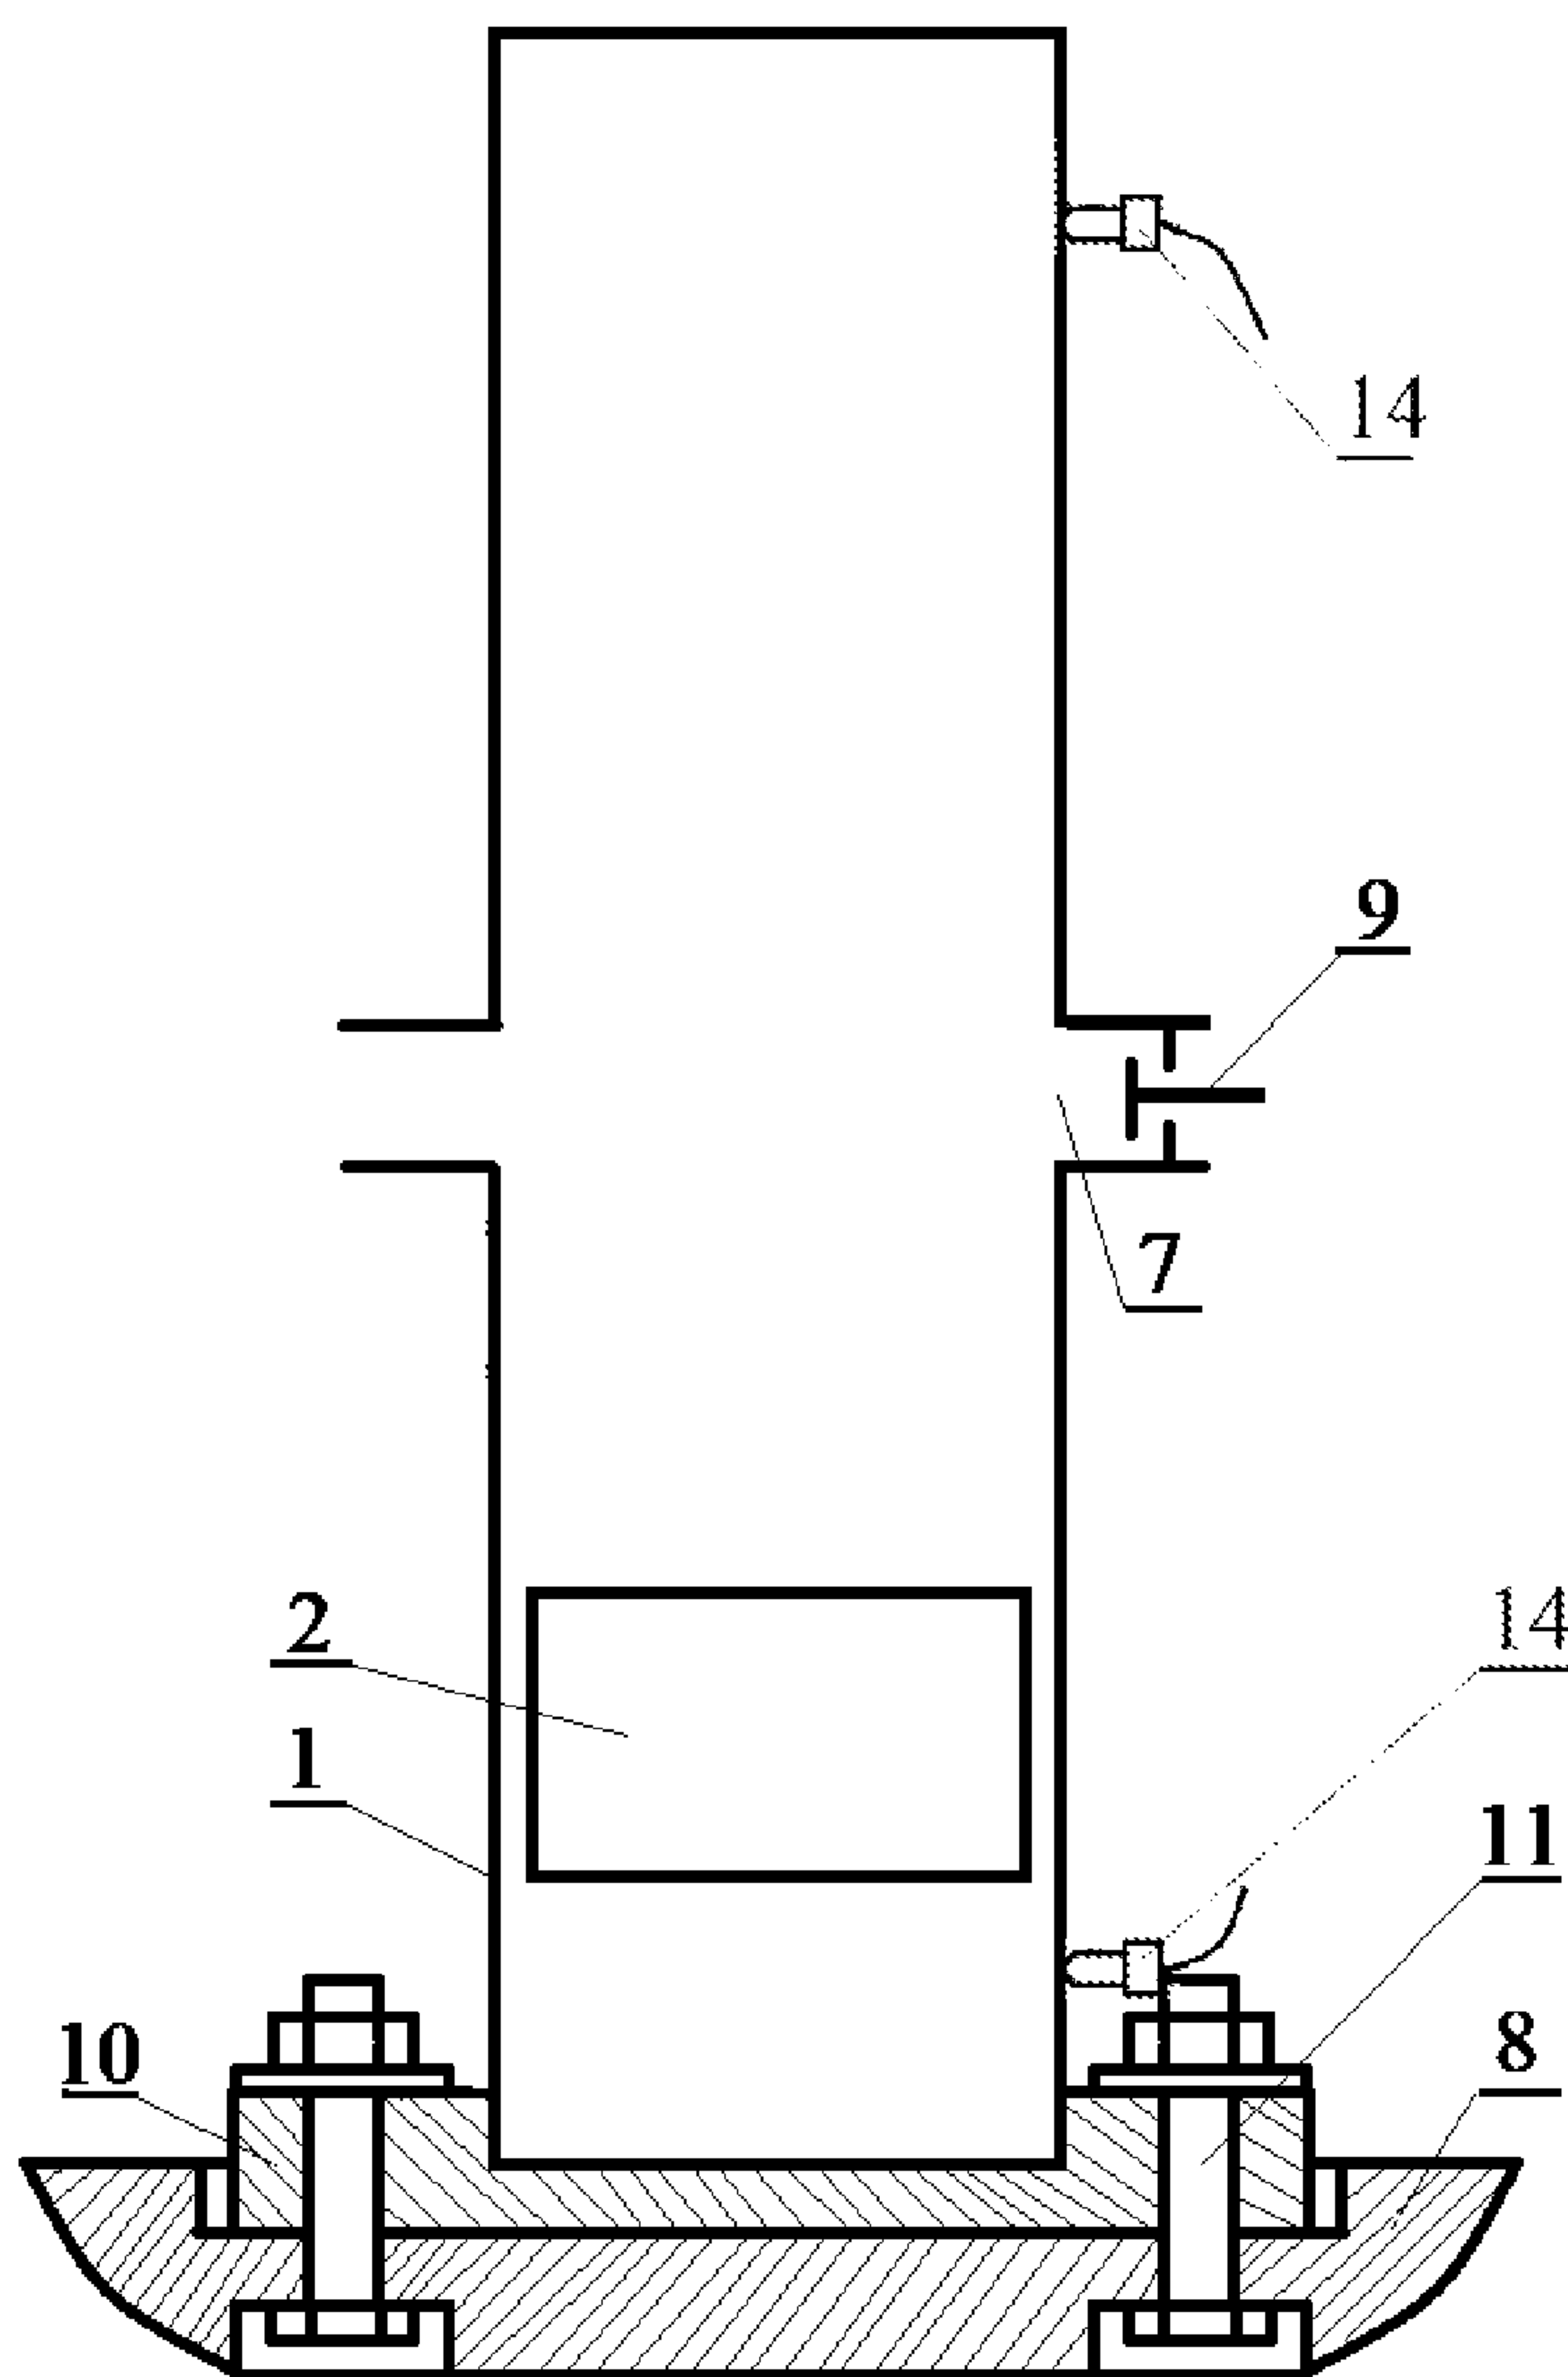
Fuel injection through injectors 14. Diesel cycle operation.
